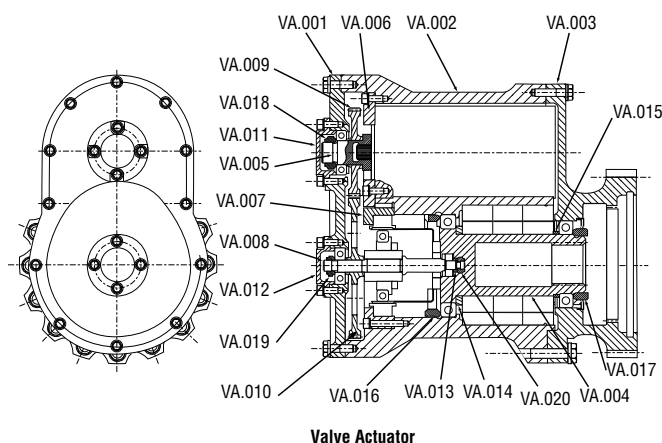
Electromechanical propellant control valve actuator assembly section view.
